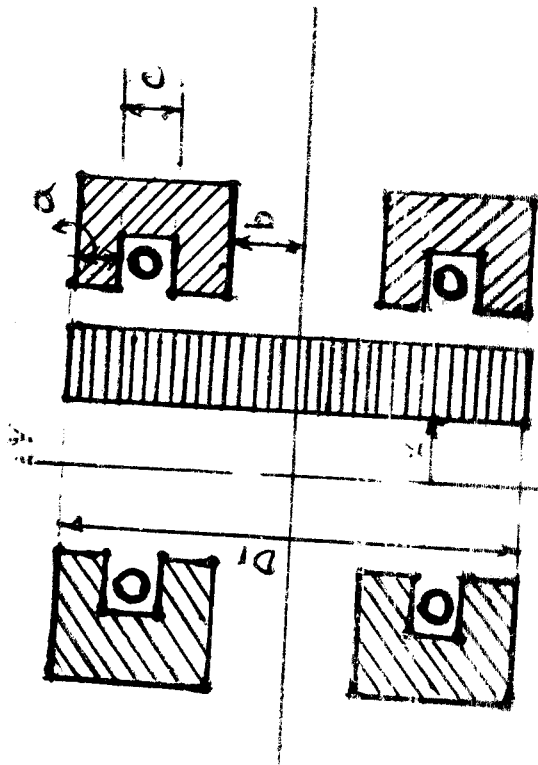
SOLENOID LINEAR OSCILLATORY MOTOR
